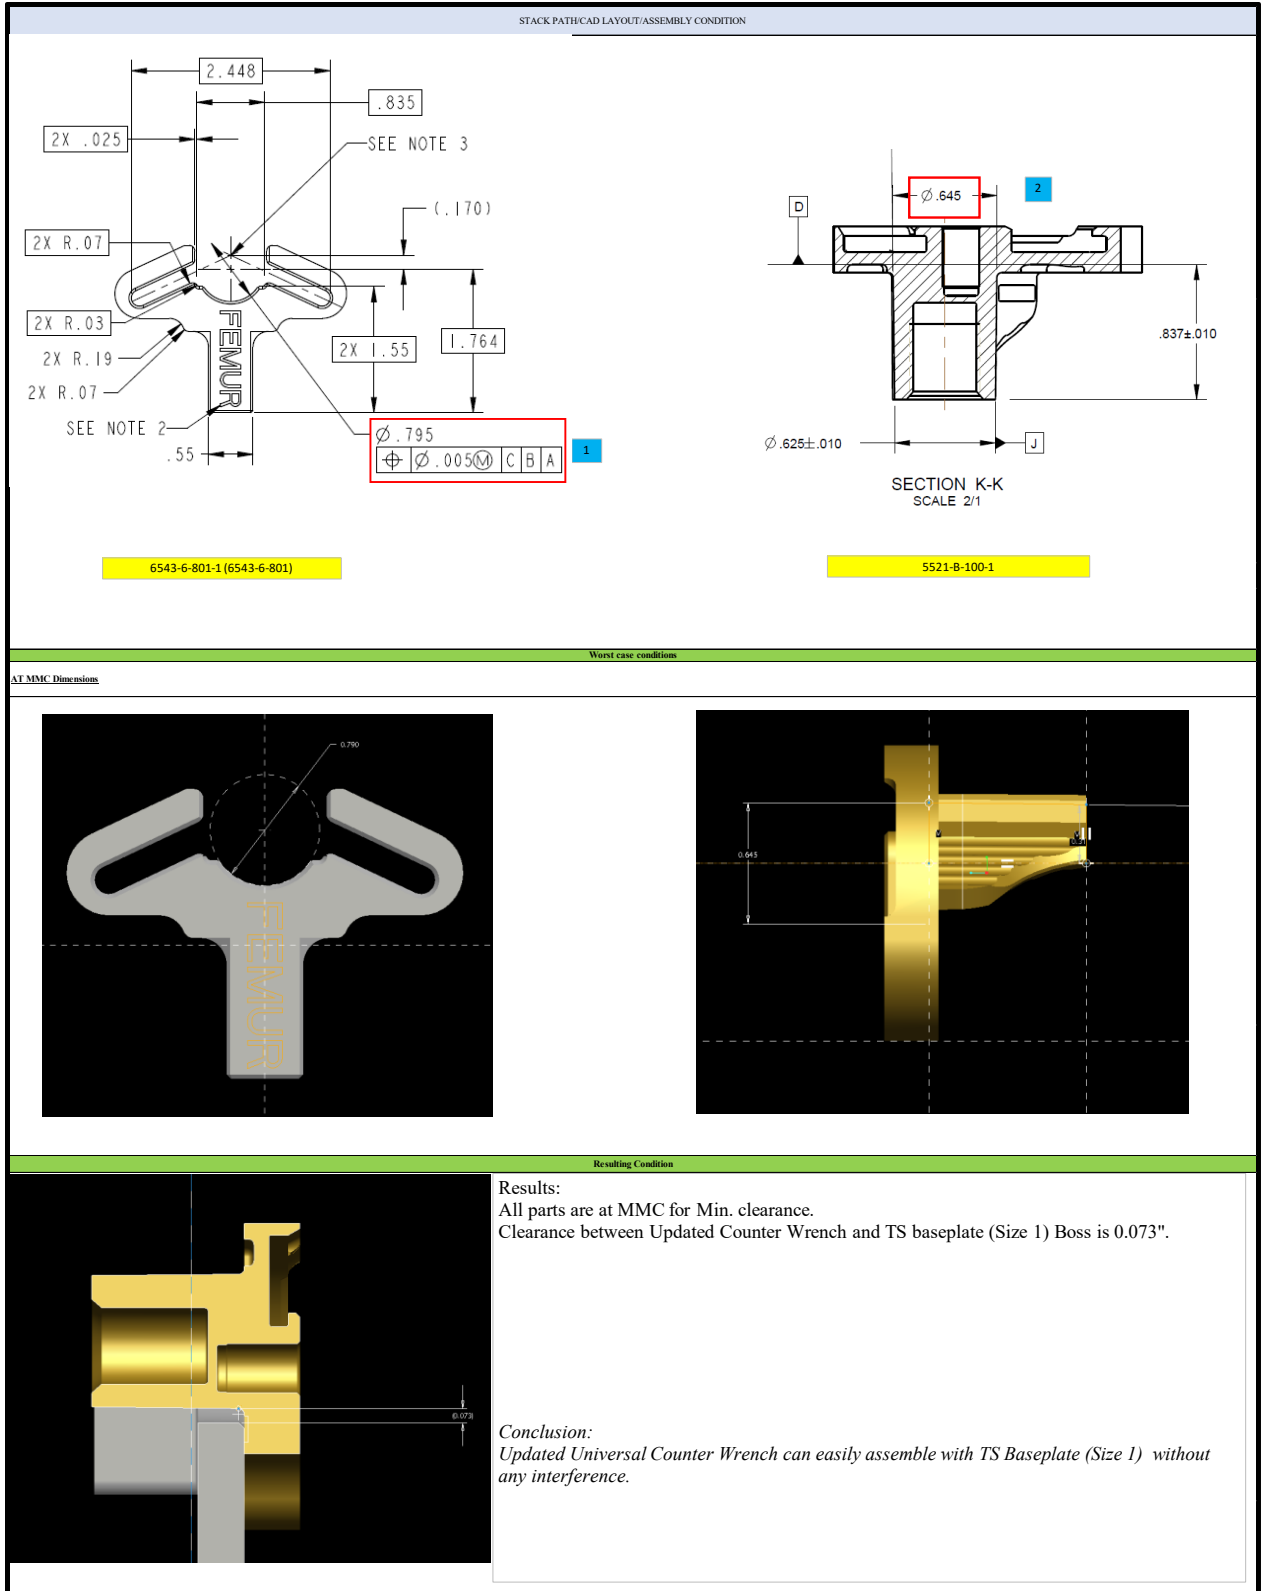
Assembly of Universal Counter Wrench with TS Baseplate Size 1 (Tolerance report T01XXX)
